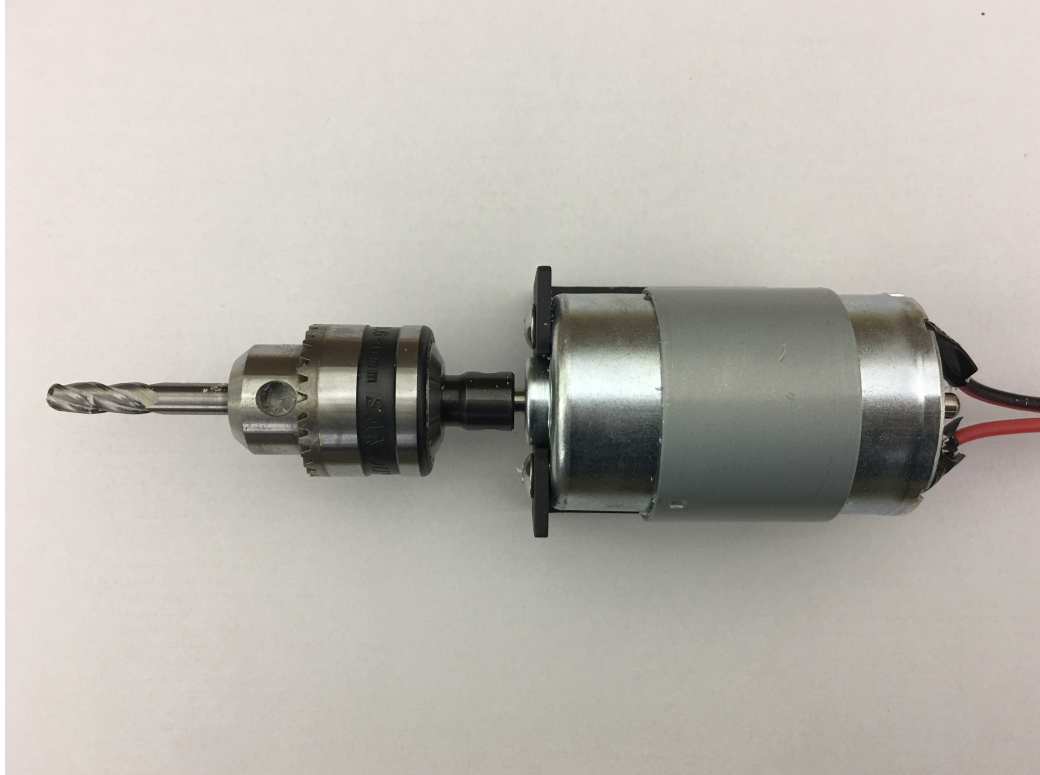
Milling tool setup with 12v DC motor, chuck and  $\frac{1}{4}$ " ball-end mill.
